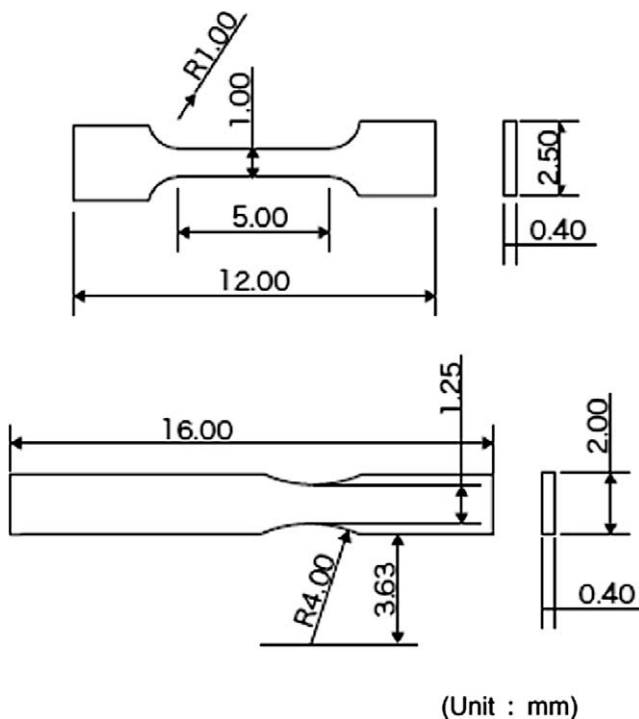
Test specimens for tensile test (upper) and for bend-fatigue test (lower).
